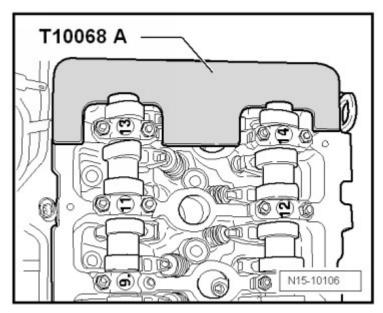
Identifying Intake Camshaft And Exhaust Camshaft
